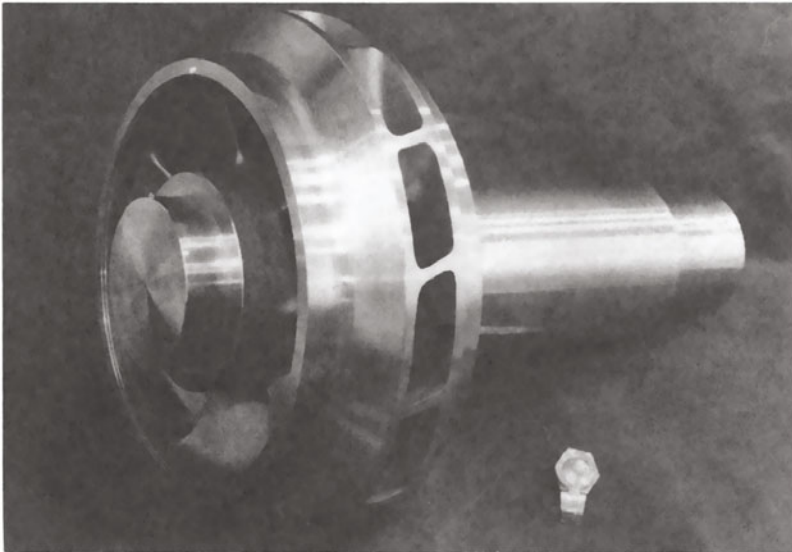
"Net-shape" impeller wheel bonded with a steel shaft
